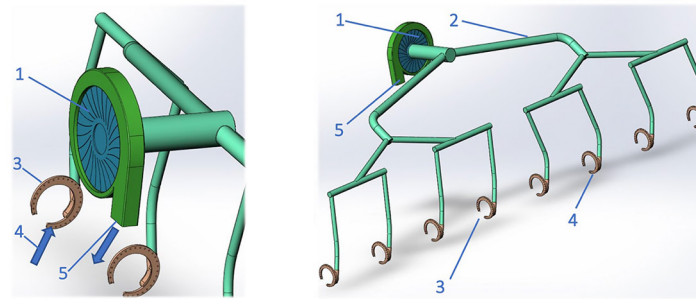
Design diagram of the pneumatic system of a precision seed drill with a centrifugal radial fan: 1 – fan; 2 – tree of pneumatic channels; 3 – seeding machines (air intake area); 4 and 5 – inlet device and outlet section of the fan
